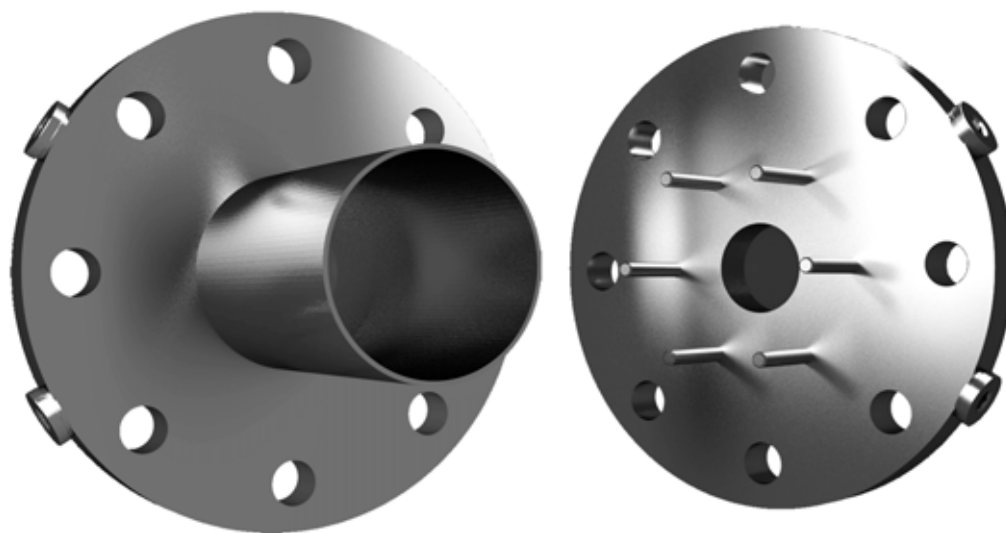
High dust mounting flange SO656R1010 (use only in combination with HT probe in flange housing, for manual purge with compressed air)
